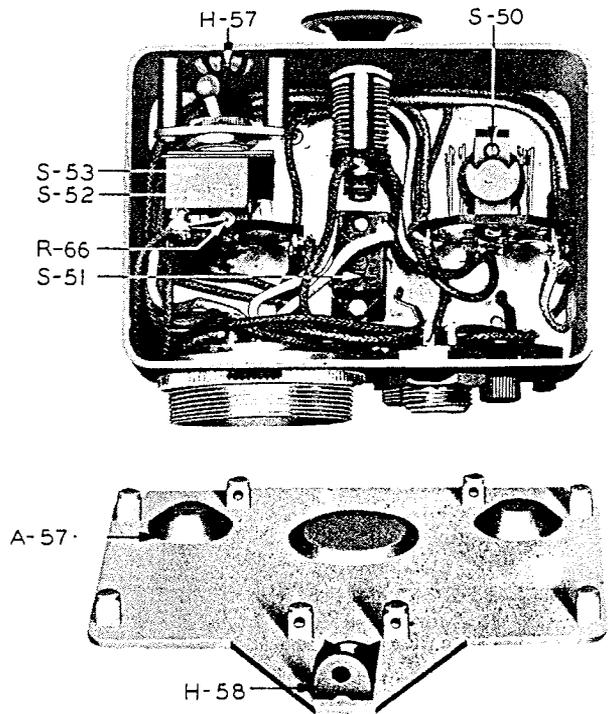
B—RADIO CONTROL BOX BC-451-A, REAR VIEW WITH COVER REMOVED
